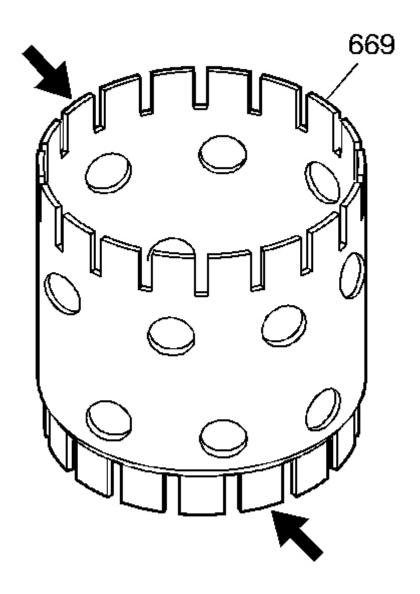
Inspection Areas On Reverse Reaction Drum Courtesy of GENERAL MOTORS CORP.
